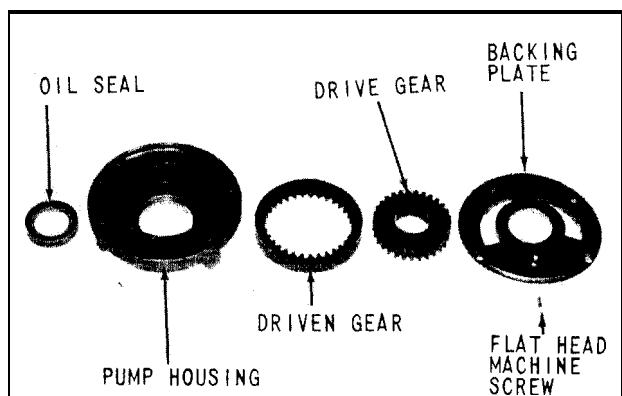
Front Pump Parts with Backing Plate, Assembly 71-1A60
